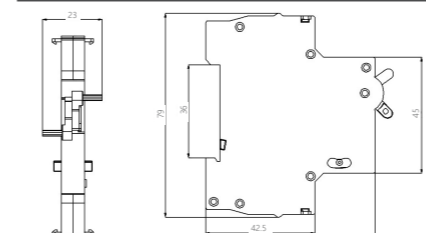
LMI-XB mechanical interlock appearance and installation dimension
